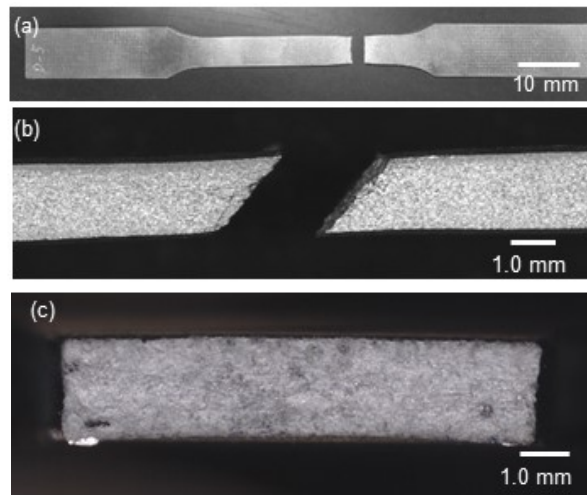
Fracture location and surface for the base material (a) top view, (b) side view, and (c) fracture surface
